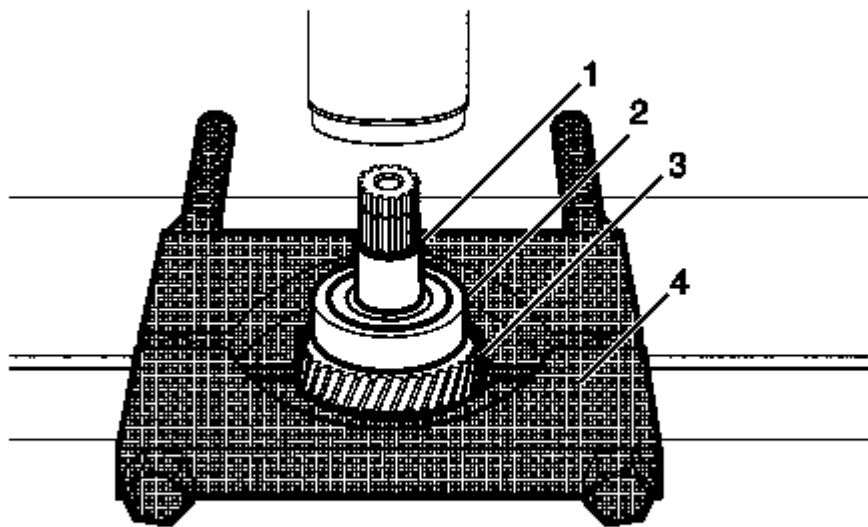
5th Gear Spacer, Left Bearing and 4th Gear
